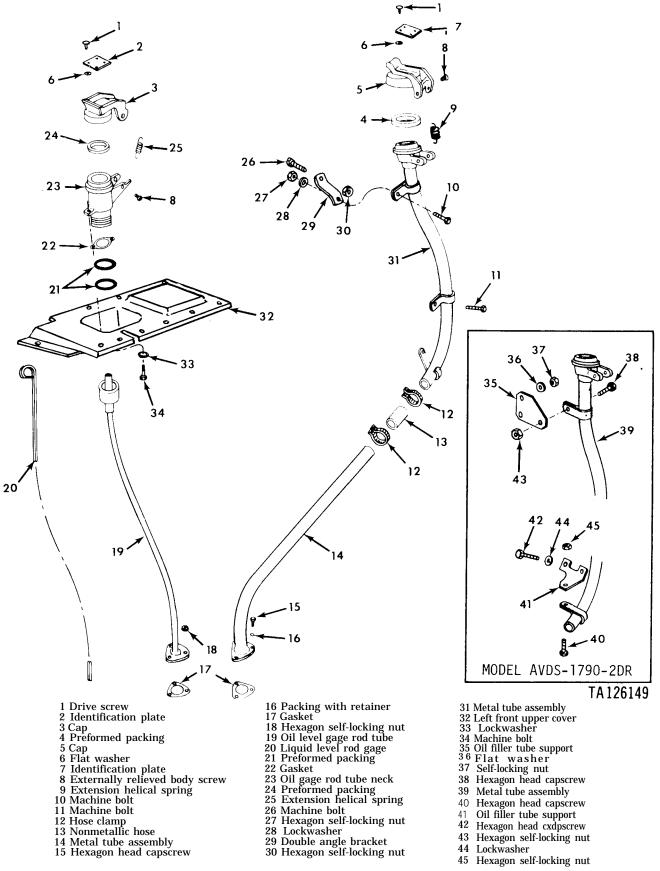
Oil filler and oil level indicator tubes and associated parts - exploded view.
